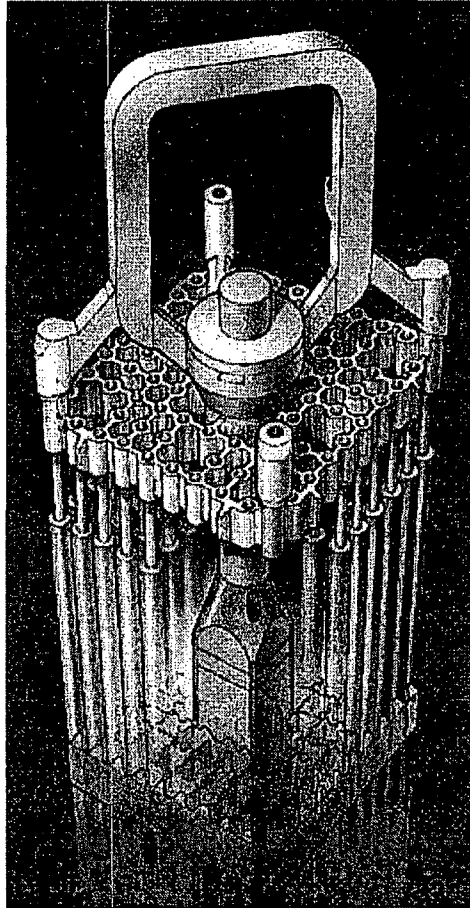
Cutaway illustration of the ATRIUM-10 assembly layout with large internal square water channel
